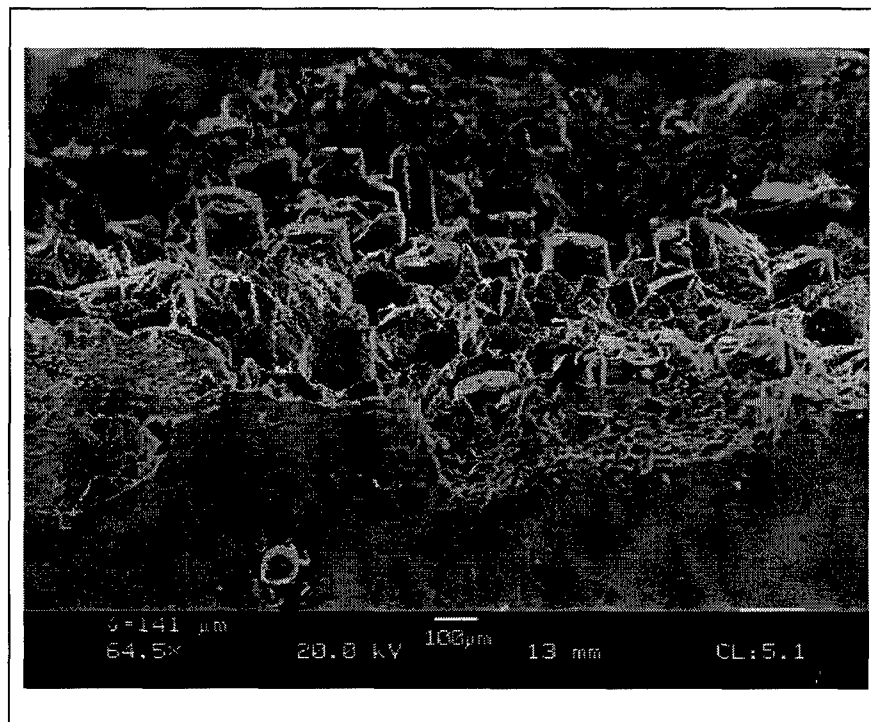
Welding Damage Site of 0.01Hz Test
